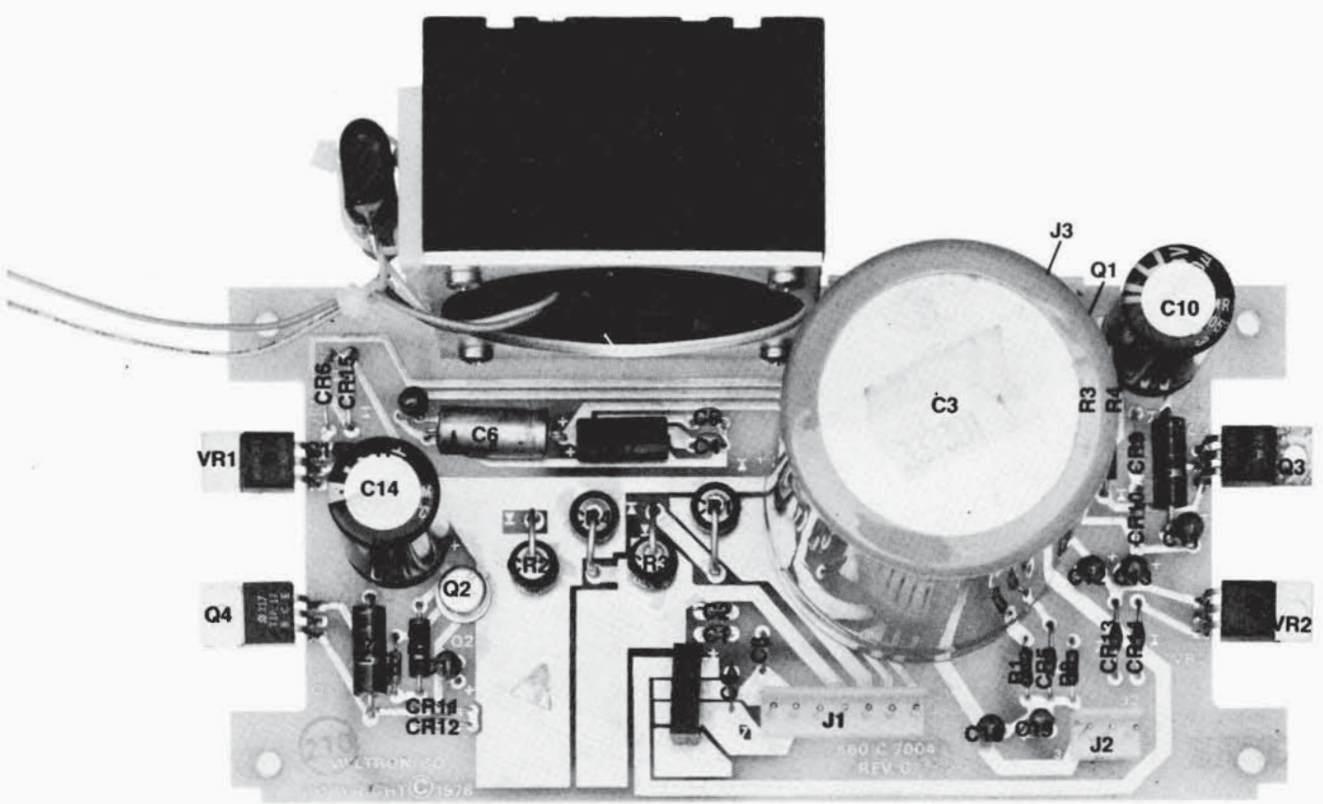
Power Supply (A4) PCB Parts Locator Diagram
